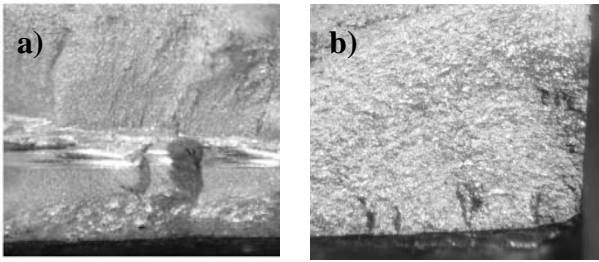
Fatigue crack initiation modes identified in welded specimens.
